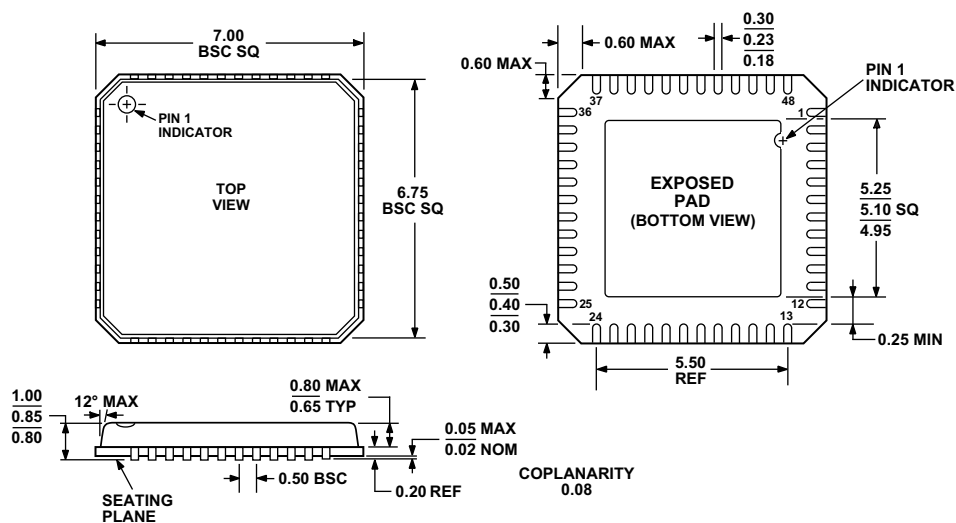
48-Lead, Lead Frame Chip Scale Package [LFCSP\_VQ]
